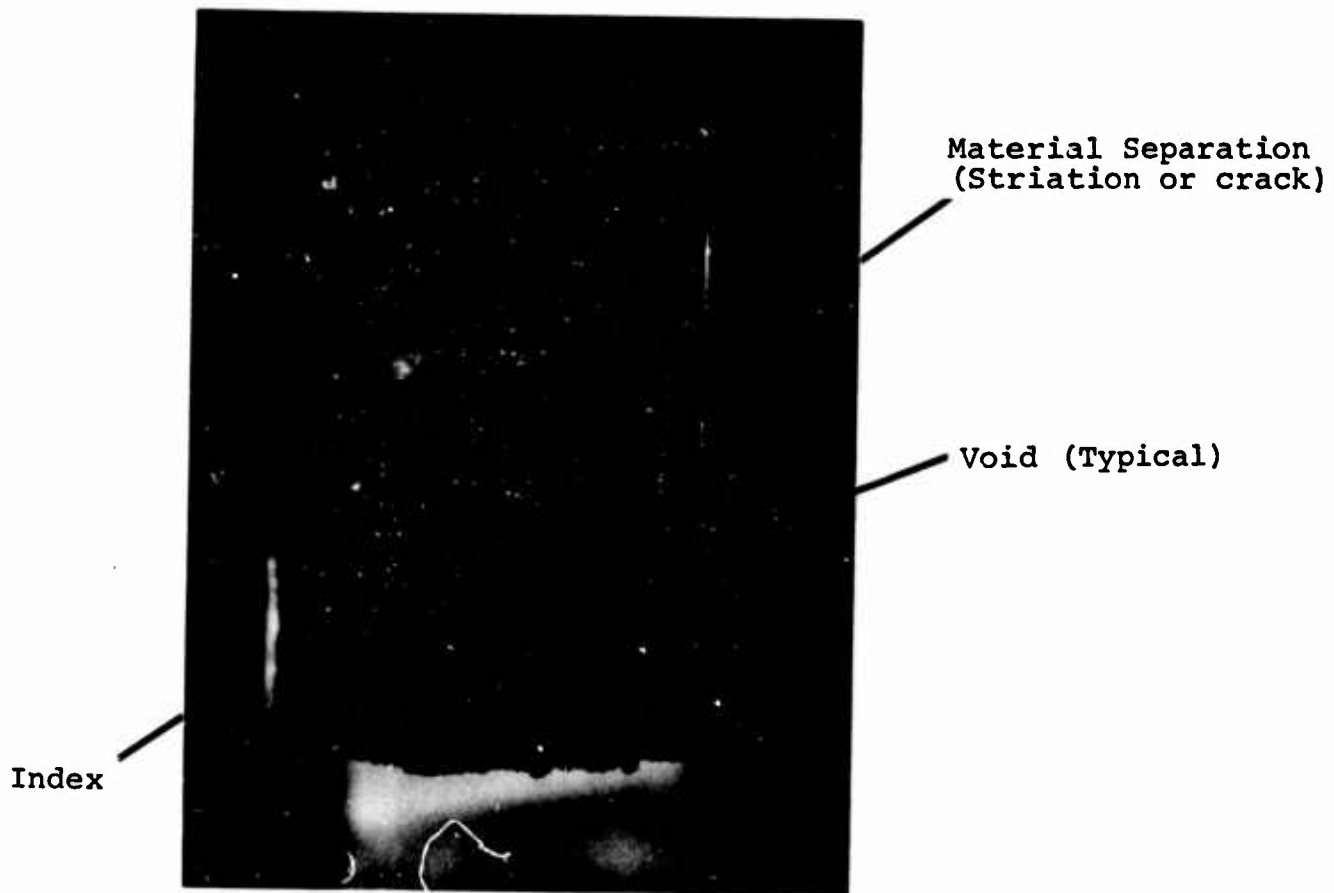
Photograph (3.3X) of Specimen CR-1-1500
